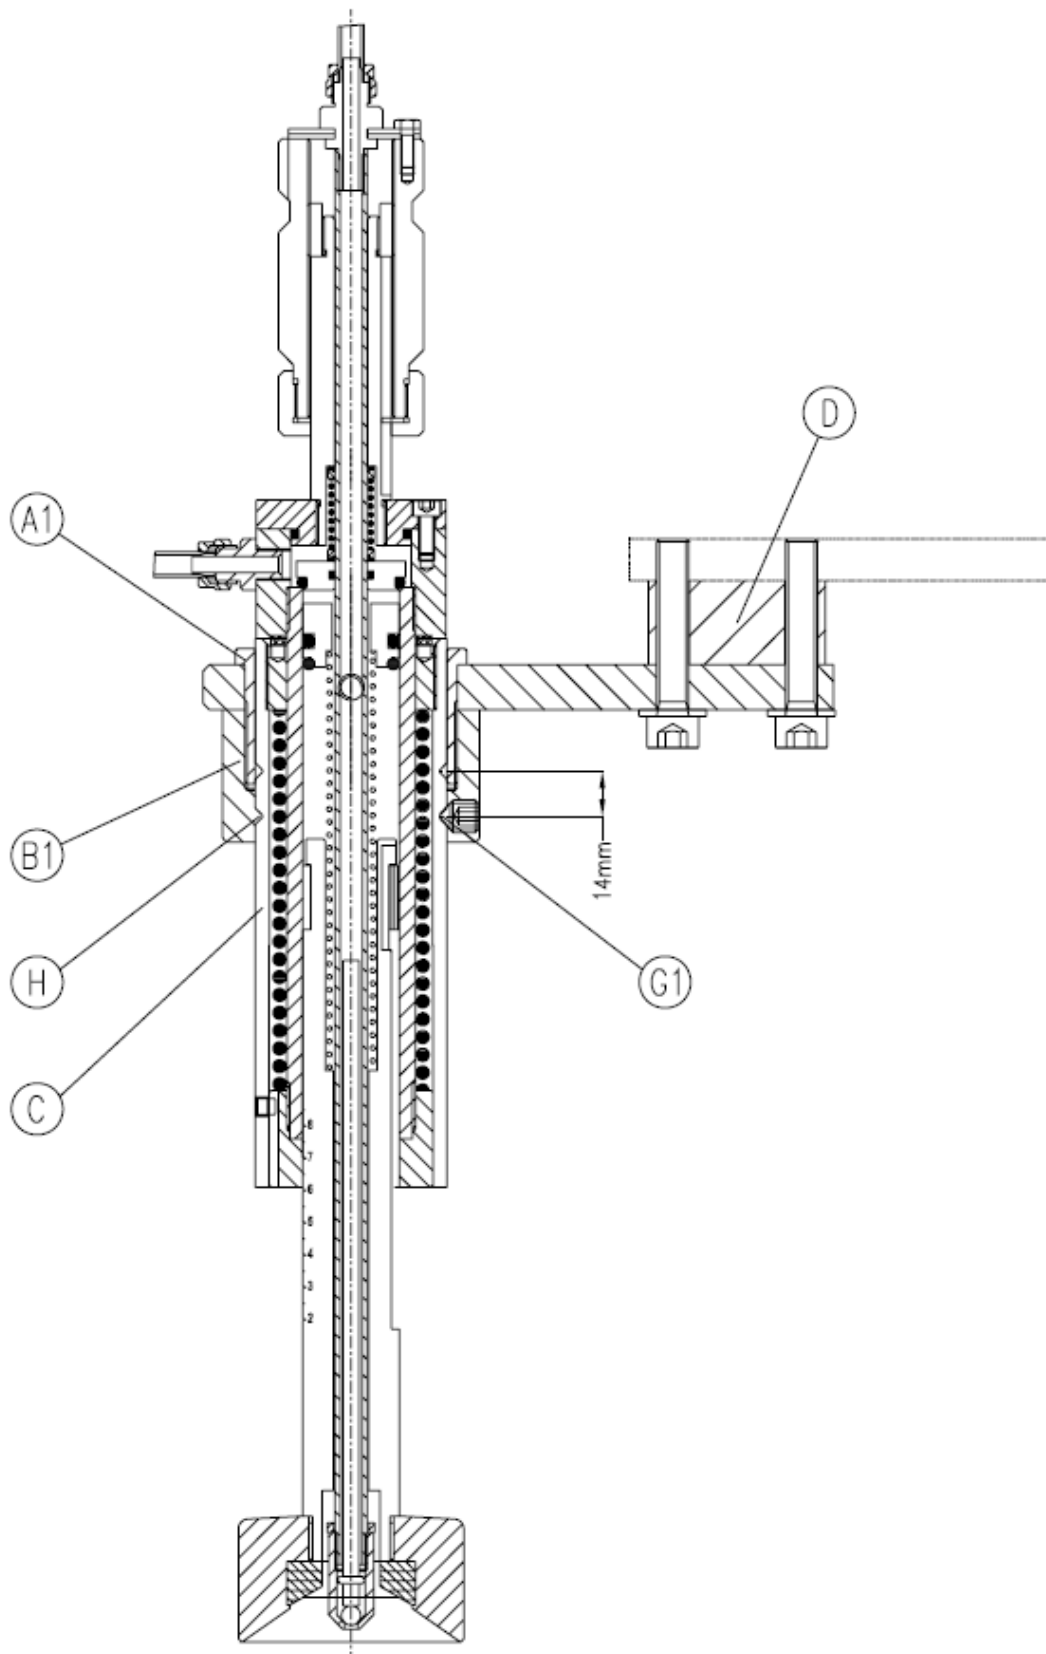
Gas injector adapted to the Vino-Lok corking machine
